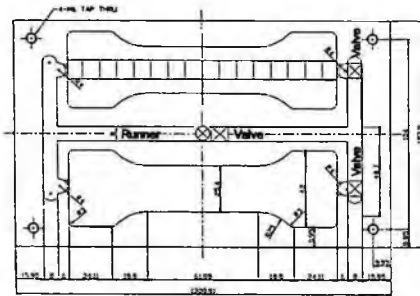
Dimensions of injection mold and parts for measuring using image processing
